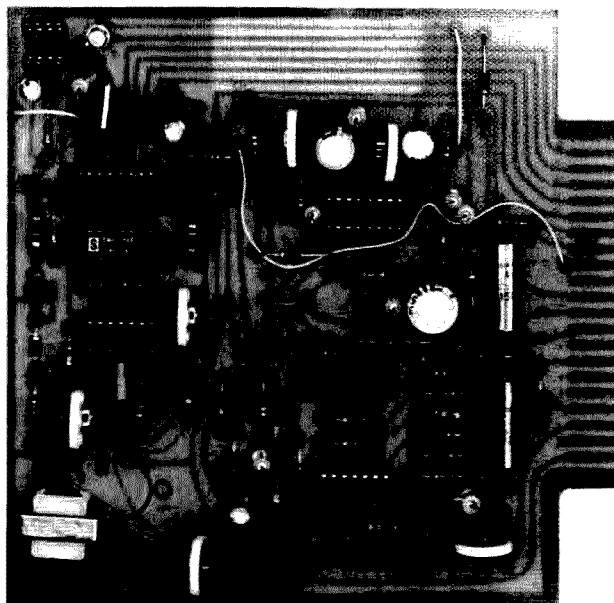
Photo F. Populated printed circuit board with externally mounted IDer on right side. Final version was all on one board.
